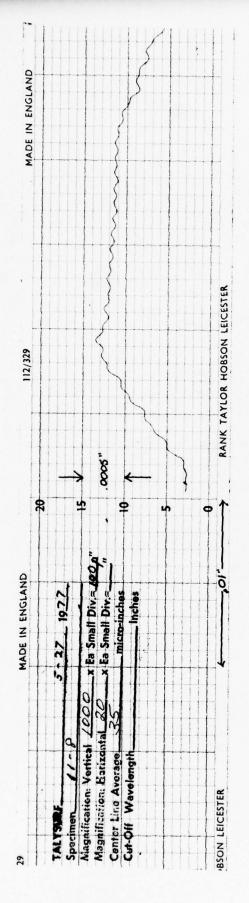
(b) Specimen 27. Smooth Unpolished Aluminum Plate (63 mils)
